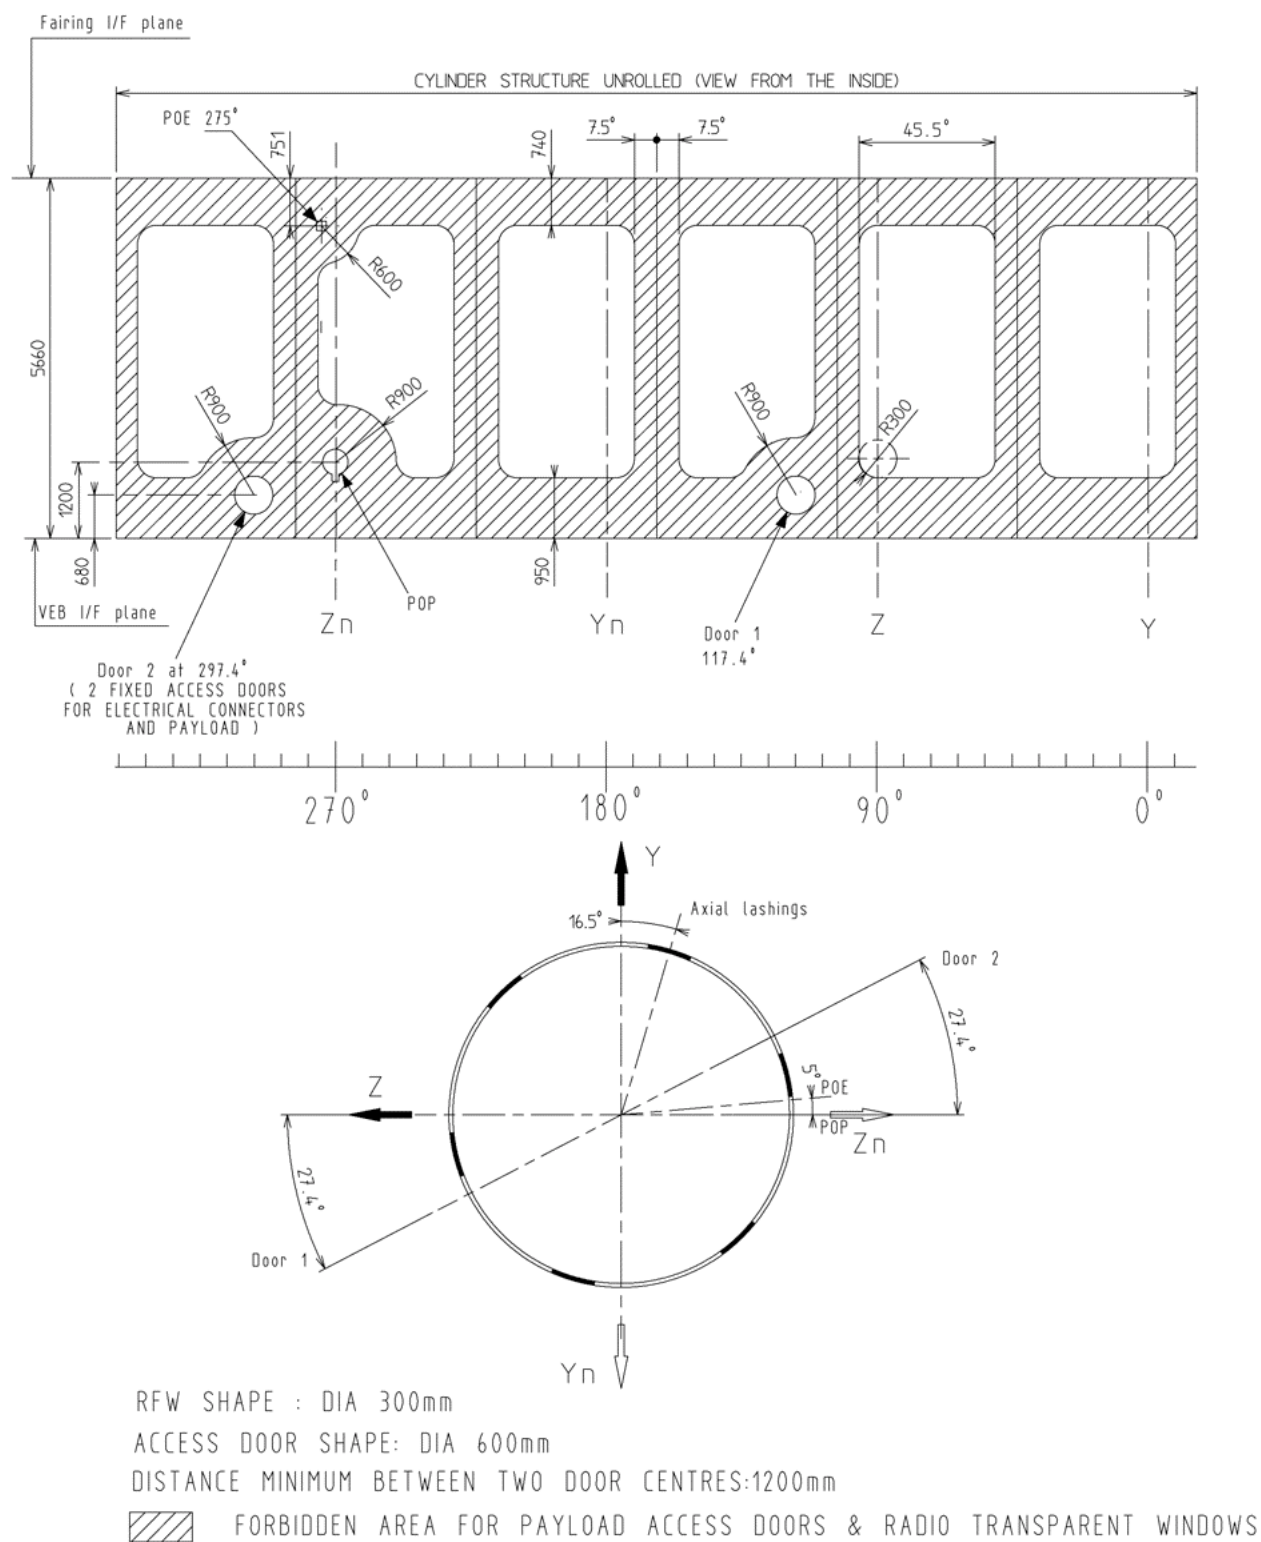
SPELTRA 5660 access doors and R/F windows locations and dimensions
